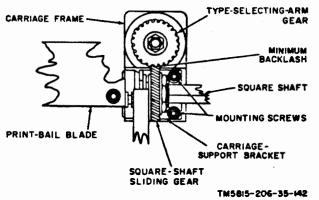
Carriage rear-support bracket adjustment. 210 rear-support bracket mounting screws. Loosen the two mounting screws and raise or lower the rear of the carriage to meet the requirement (a above). Tighten the screws and recheck the requirement. Check related adjustment (par. 224) for type-selecting arm alinement.
